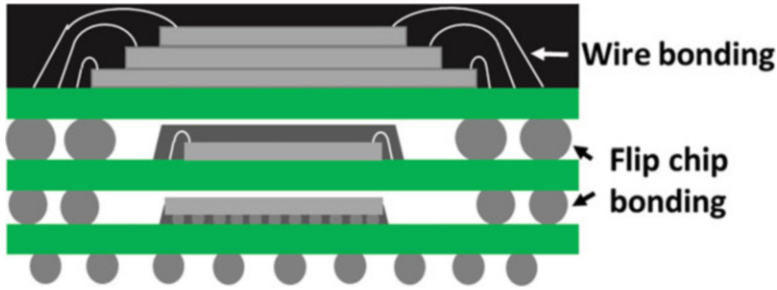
Schematic illustration of package-to-package 3D integration (adapted from Ref. [3])
